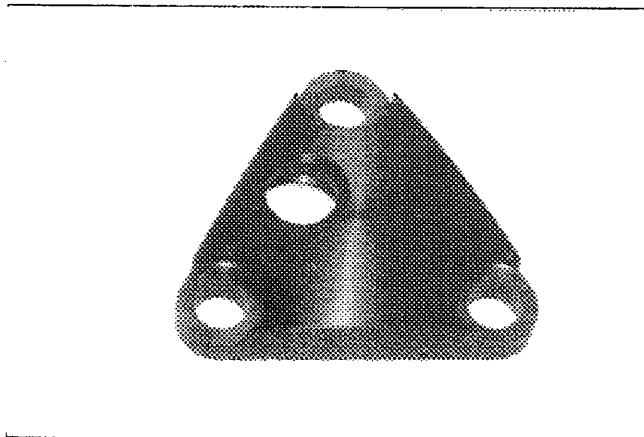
(REAR REINFORCED TOP MOUNTING PLATE : TYPE A)
